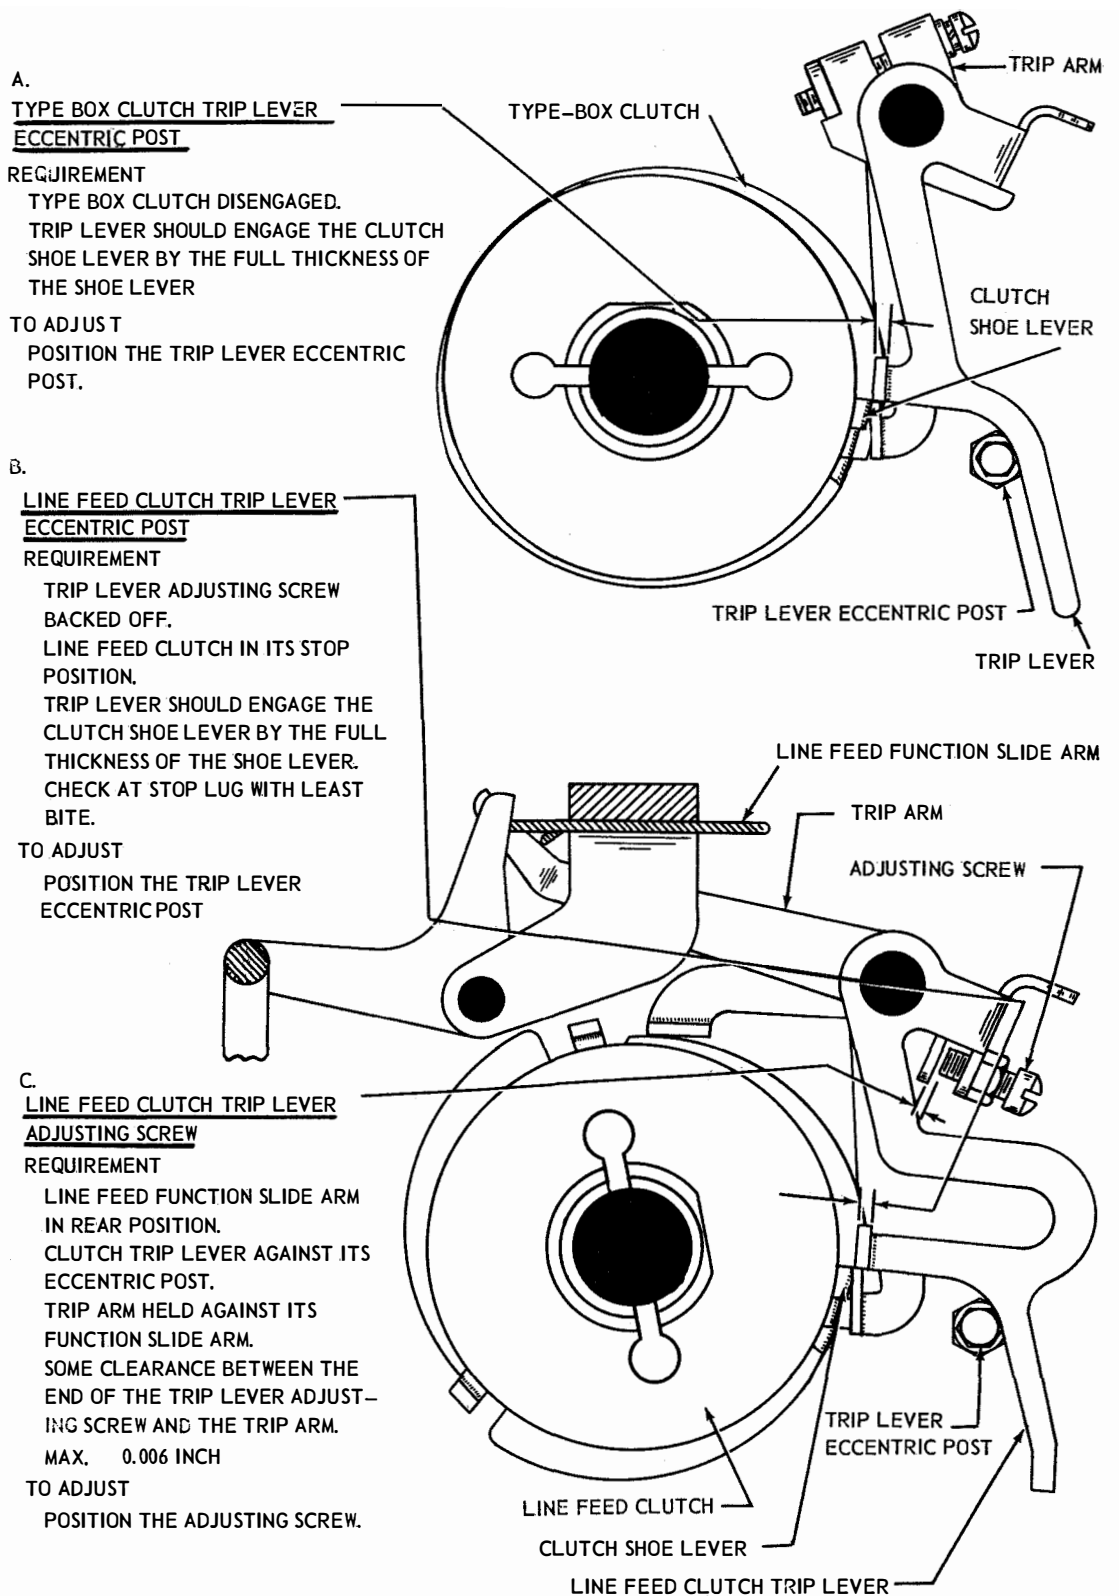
TYPING UNIT, TYPE BOX CLUTCH AND LINE FEED CLUTCH MECHANISM
